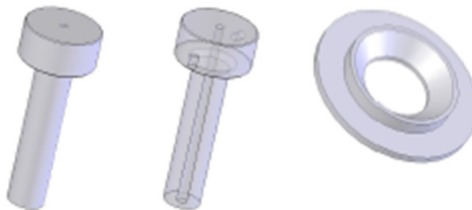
Sprue bushing and Centring Ring (DS, Standard Components, 2008)
